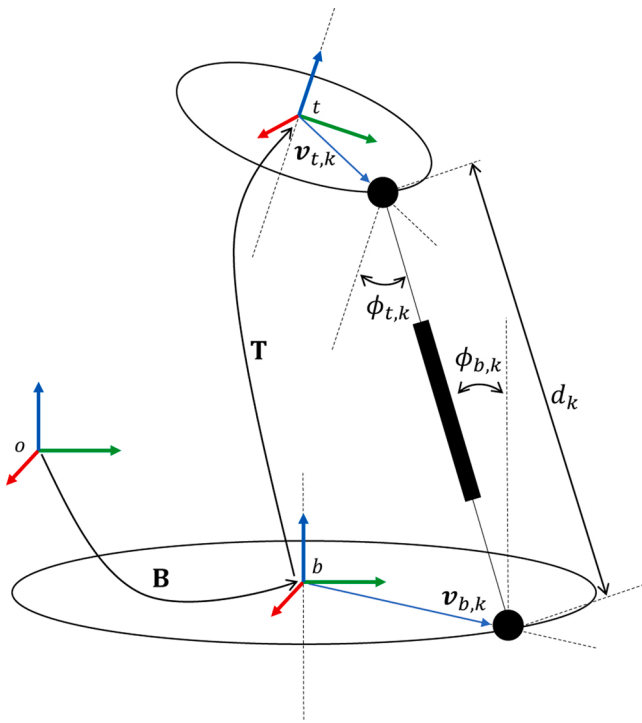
Kinematic model of the flexible fixture – Stewart platform.
